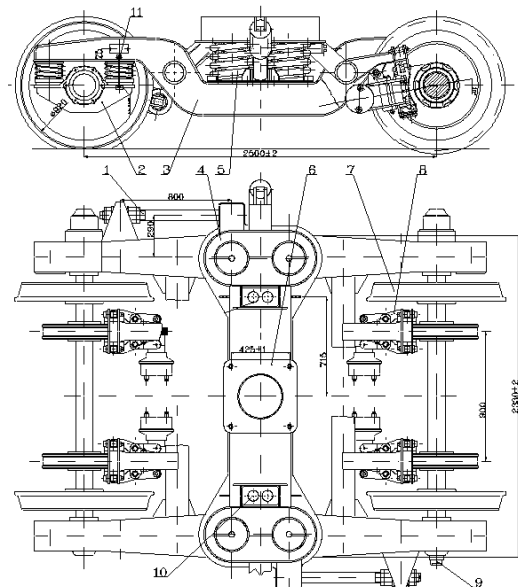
T73-AD bogie: 1-linker; 2-axle box; 3-frame; 4- bolster; 5-secondary spring suspension; 6-center pivot; 7-wheelset; 8-brake system; 9- system against dragging; 10- side bearer; 11-grounding.
